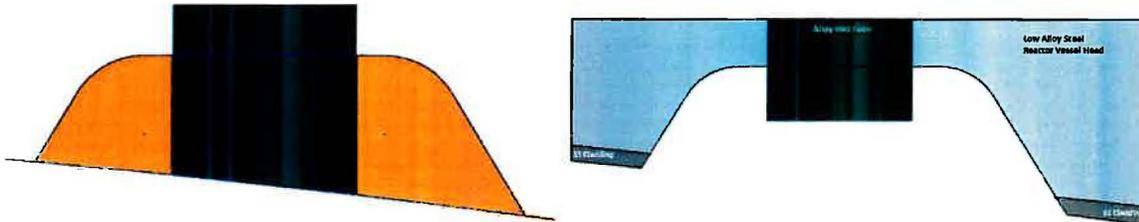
Picture on the left shows the existing tube, butter, and J-Weld. Picture on the right shows the final excavation after EDM.
